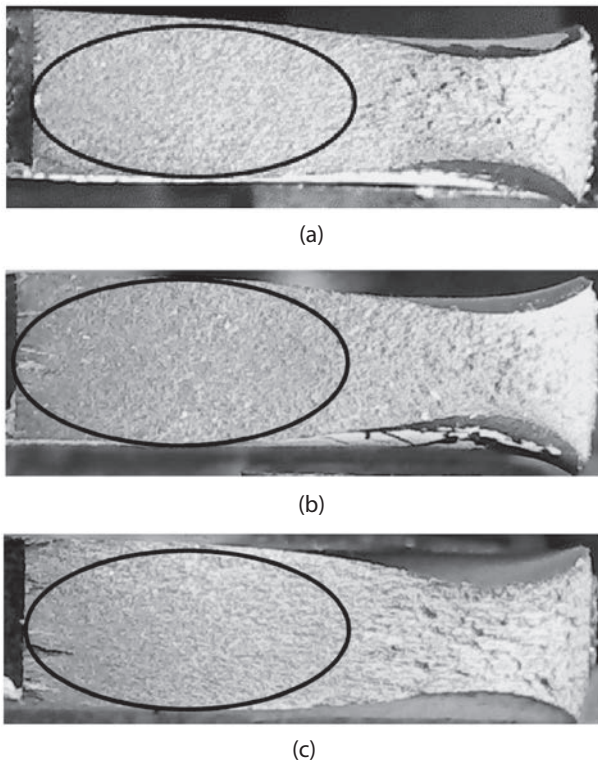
Fractography of fatigue samples, a) NT specimen, b) SP A0,003, and c) SP A0,005
